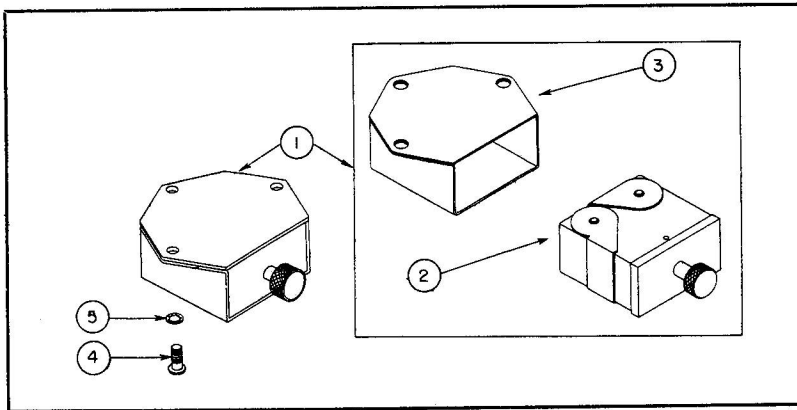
Exploded View - Compass - Compensator Assembly - Type D-12
